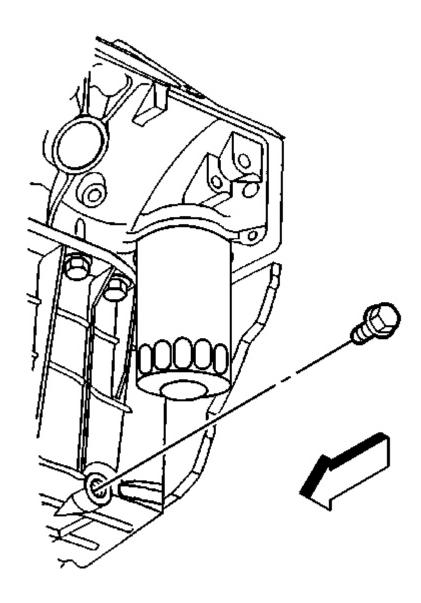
Identifying Oil Drain Plug Courtesy of GENERAL MOTORS CORP.
